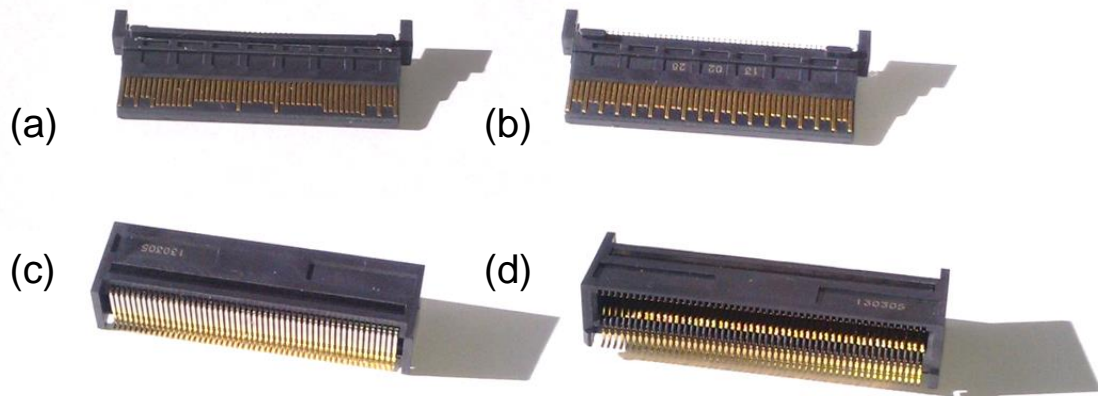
(a) Plug bottom side showing sequenced connection contacts, (b) Plug top side showing GSSG format RF contact groups, (c) Host Connector rear view – pins connected to Host PCBs, (d) Host Connector front view – accepts the Plug.
